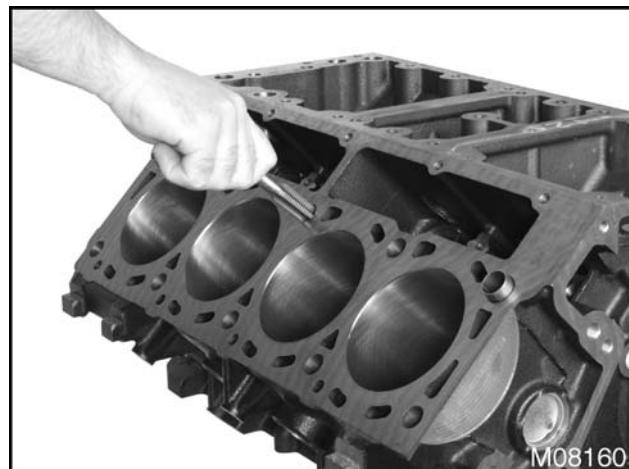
Cylinder Head Bolt Tap ZTSE4744
